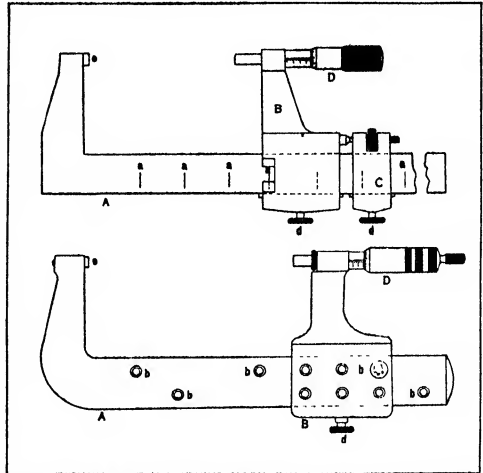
BEAM MICROMETER CALIPERS. (A) BEAM. (B) HEAD, ADJUSTABLE BY EQUAL INCH DIVISIONS, BY LINES a, a, OR HOLES b, b, AND PLUG b' HOLES. (C) ABUTMENT BLOCK WITH SCREW c FOR FINE ADJUSTMENT. d, CLAMPING SCREWS. (D) MICROMETER. e, ANVIL
